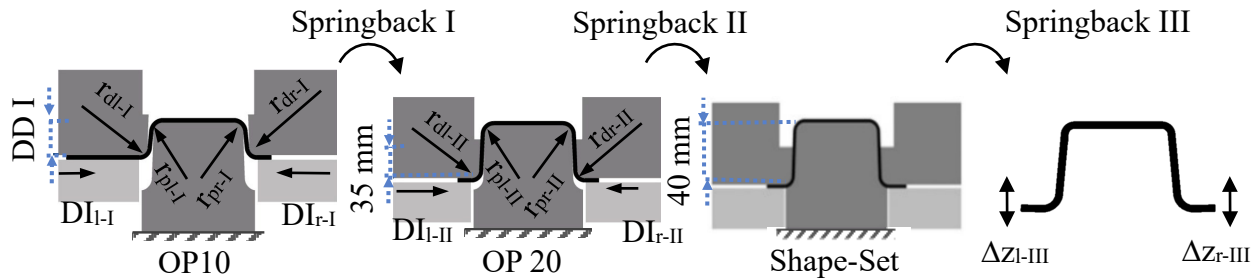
Multistage forming and springback simulation of deep-drawing with alternating draw-in.
